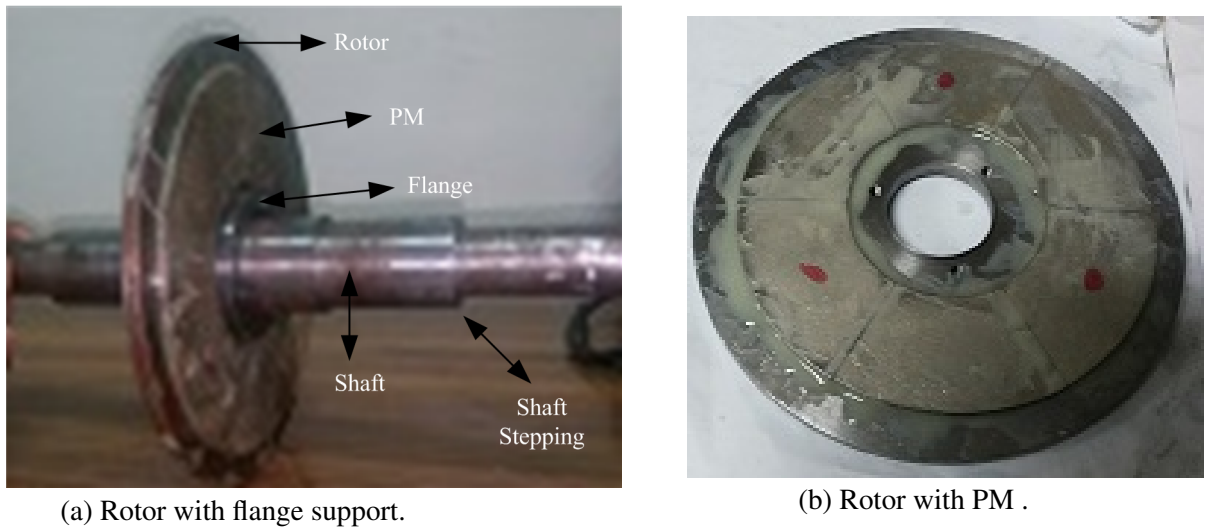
Rotor fitted on the shaft through flange support and magnets pasted on both sides of the rotor surface.
